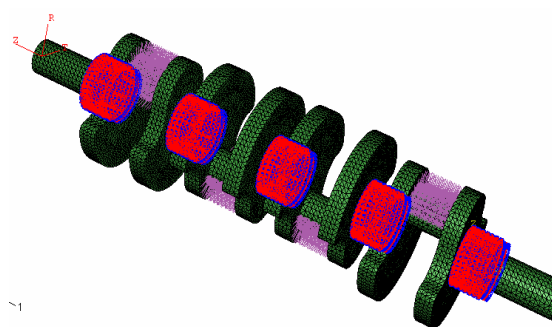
Simply supported at bearing locations and pressure applied on appropriate surfaces
